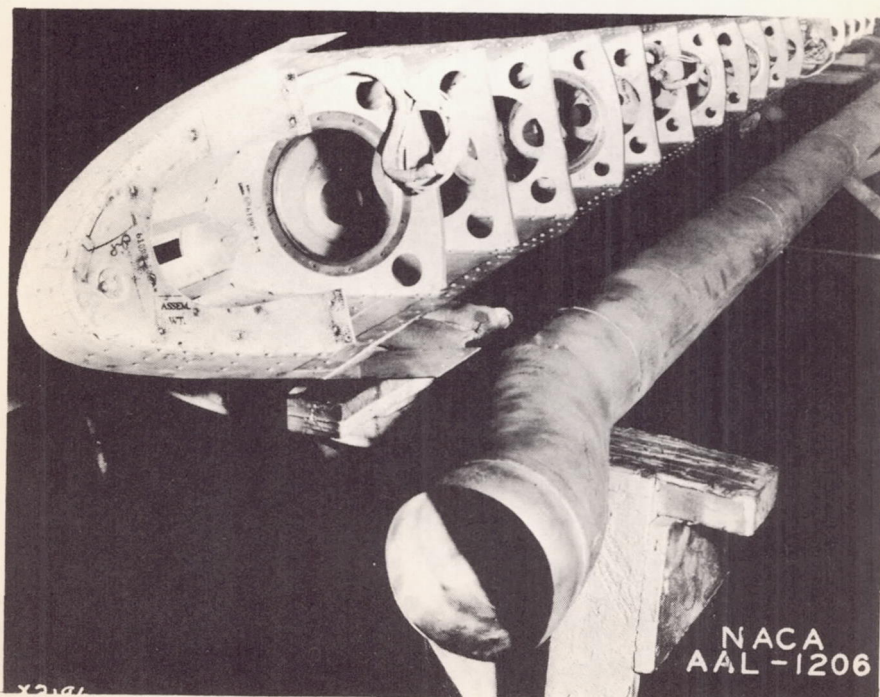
Exhaust wing heating tube and wing leading edge shown disassembled.
